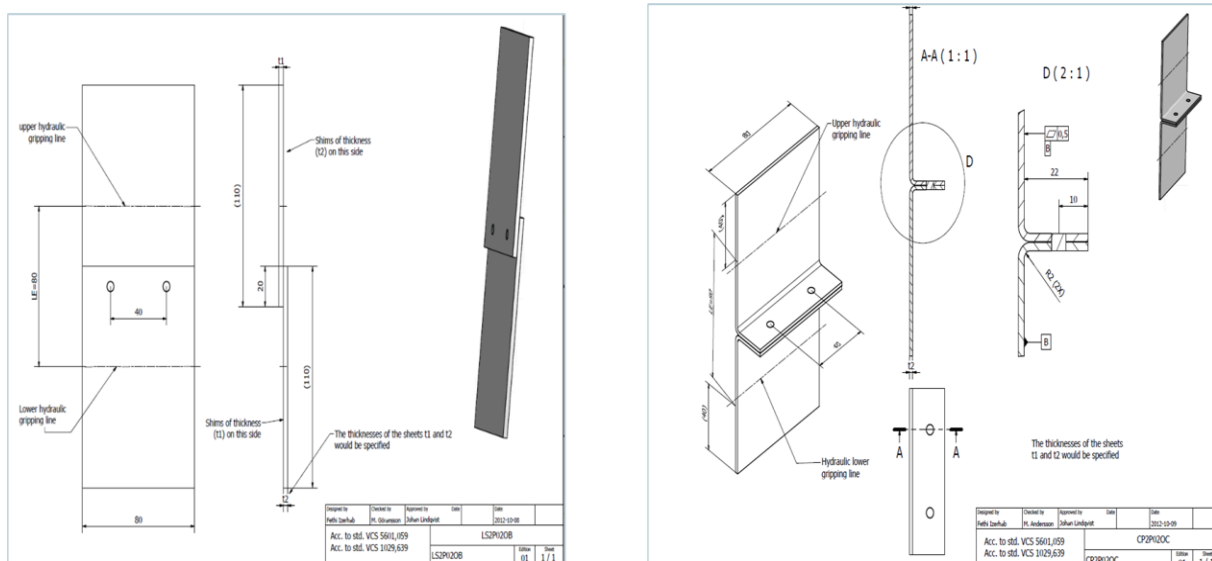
Drawing of how the lap-shear and t-peel are manufactured for fatigue testing.
